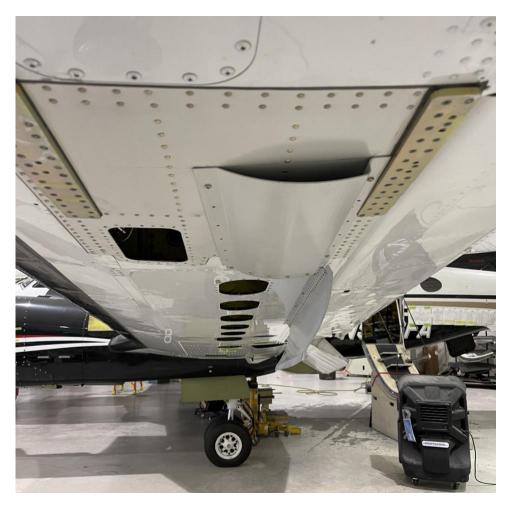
Wing External Electrical Conduits and Hardpoints (gold strips near top of photo)
